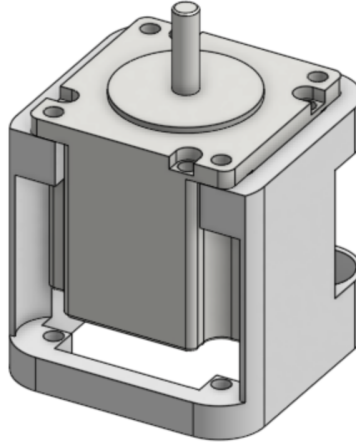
Carousel motor aligned with the Carousel Motor Mount.
